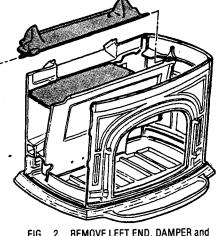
REMOVE LEFT END, DAMPER and SMOKESHELF
